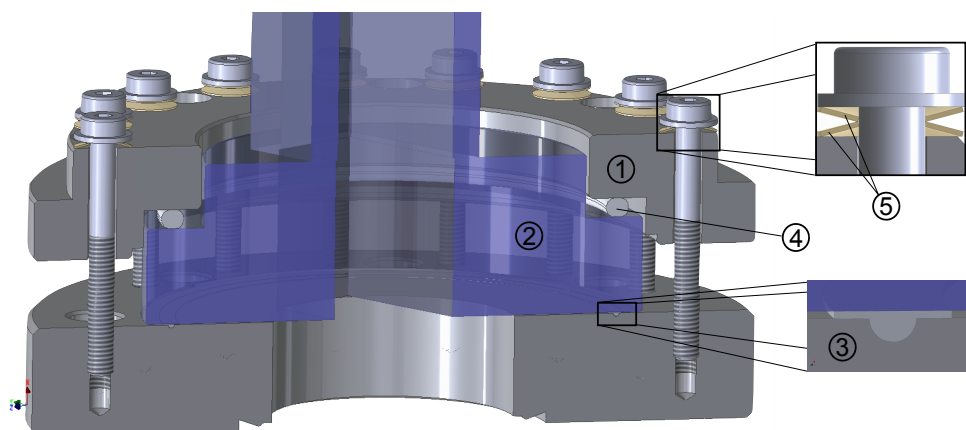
Connection of the glass cell to the vacuum chamber: A collar flange (1) presses the glass flange (2) onto an indium wire (3) that is placed in a groove in the vacuum adapter flange. A compressible Helicoflex<sup>®</sup> seal ring (4) compensates unevennesses of the surfaces. Two disk springs (5) under the screw heads indicate the tightening force at each screw.
